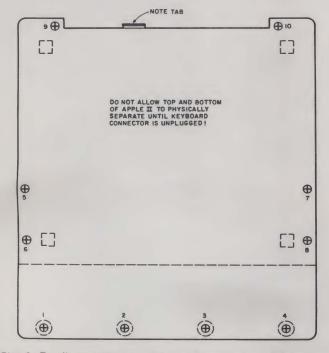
To disassemble your Apple II, remove only the screws shown here.
